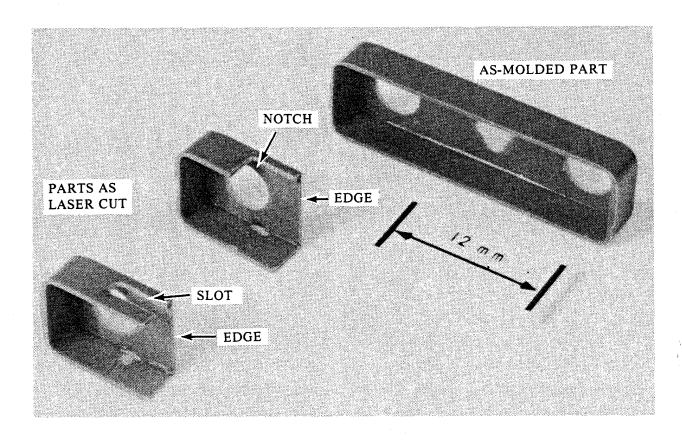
0.4-mm-Thick Laser Cut Fiberglass/Diallyl Phthalate Molded Part
